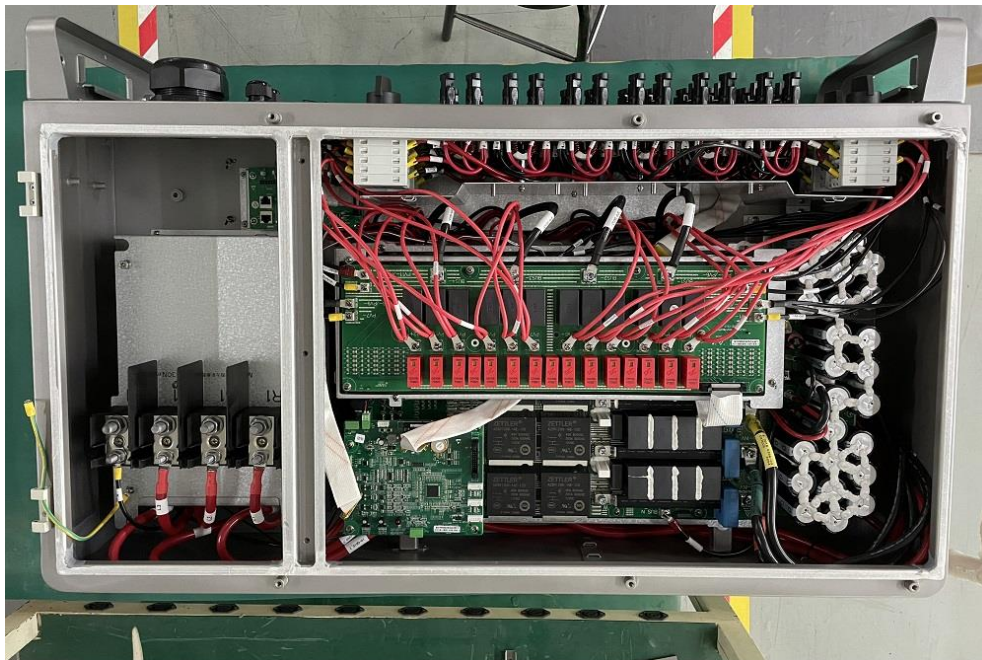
Terminal view 1 of C6-70K-T12-LV-40
